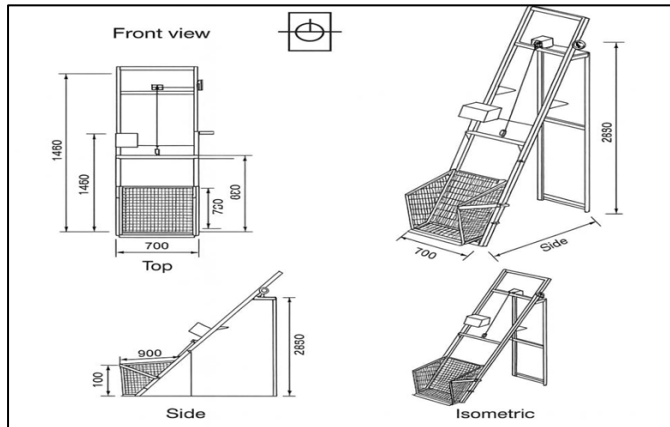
Orthographic layout of the ADCS structure with dimensions in mm
